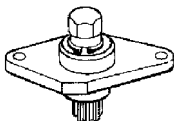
View of Flywheel Turning tool (49FA 42 065)
